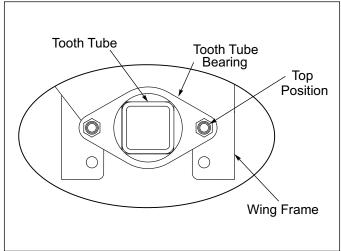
Wing Tooth Tube Bearing Position for 20" Crowfoot or 20" Optimizer Wheels
